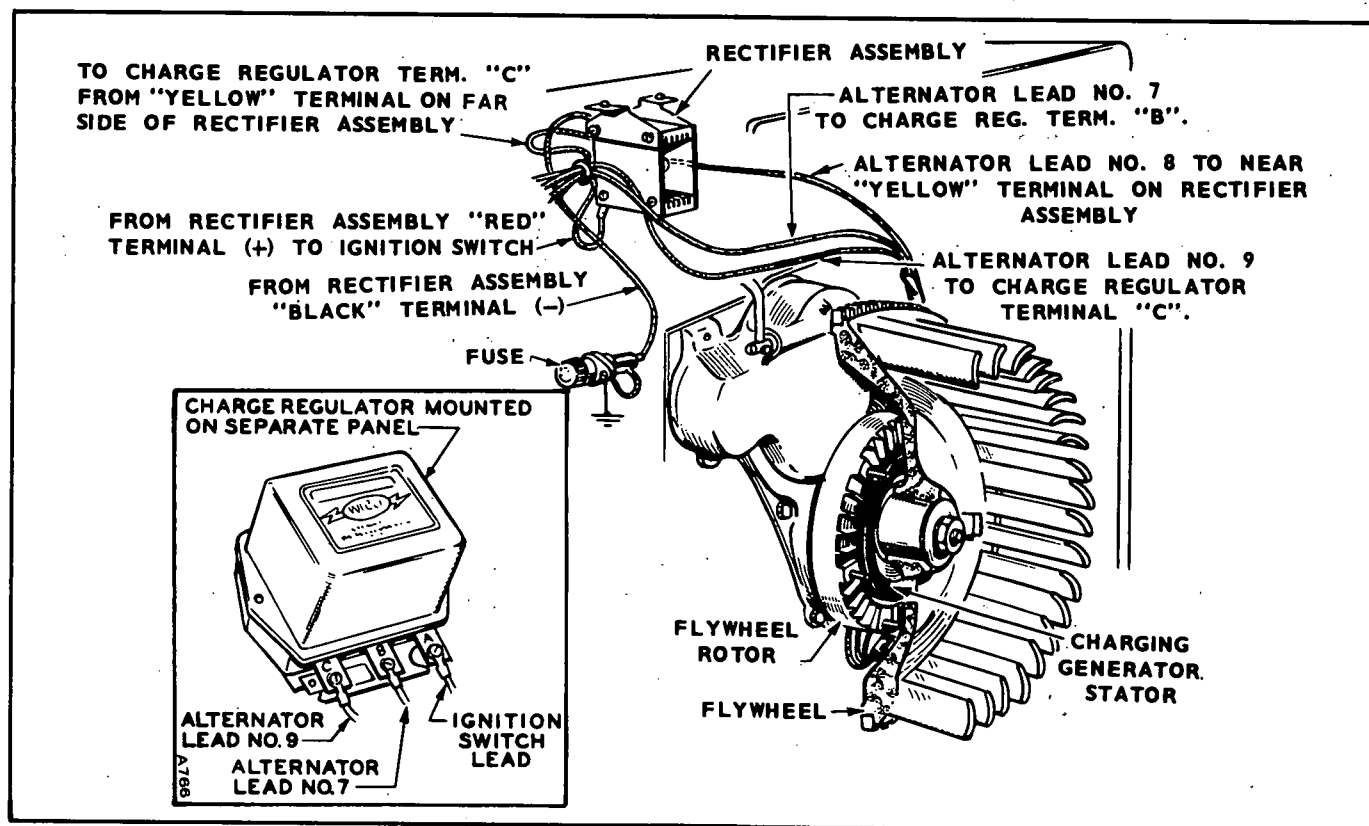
FLYWHEEL ALTERNATOR (PRIOR TO SPEC T)
